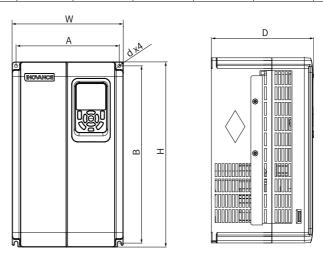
Outline dimensions and mounting dimensions of T5 to T6 models
